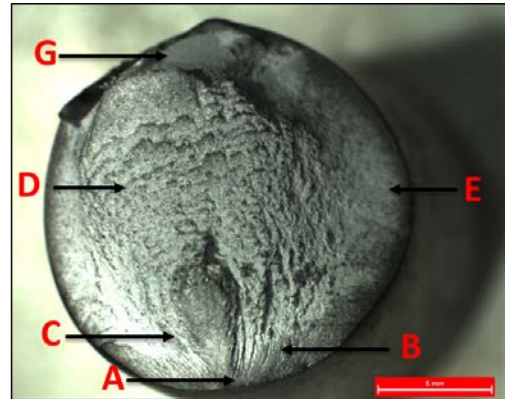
Fractograph of "As Machined"/T6 Test Specimen 4
